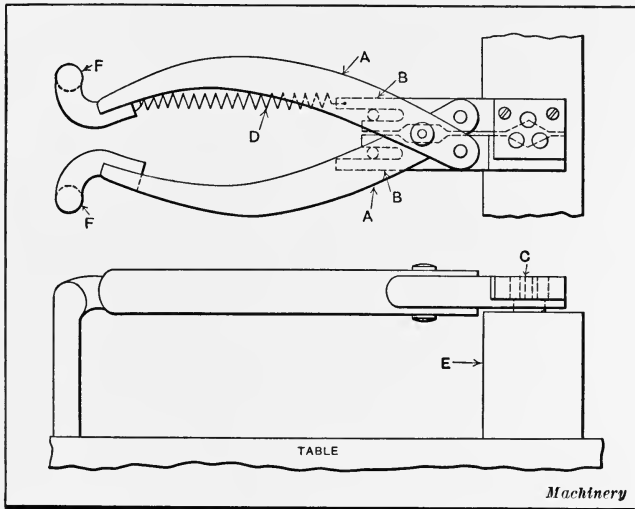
Jig developed for handling Pinions in Counterboring Operation
